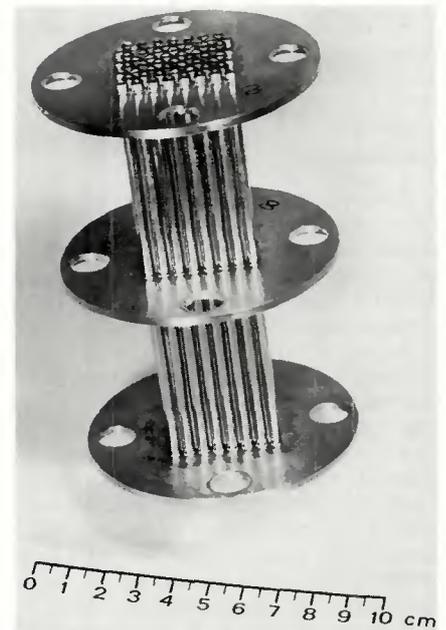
Tubular recuperator specimen brazed in preliminary brazing tests
